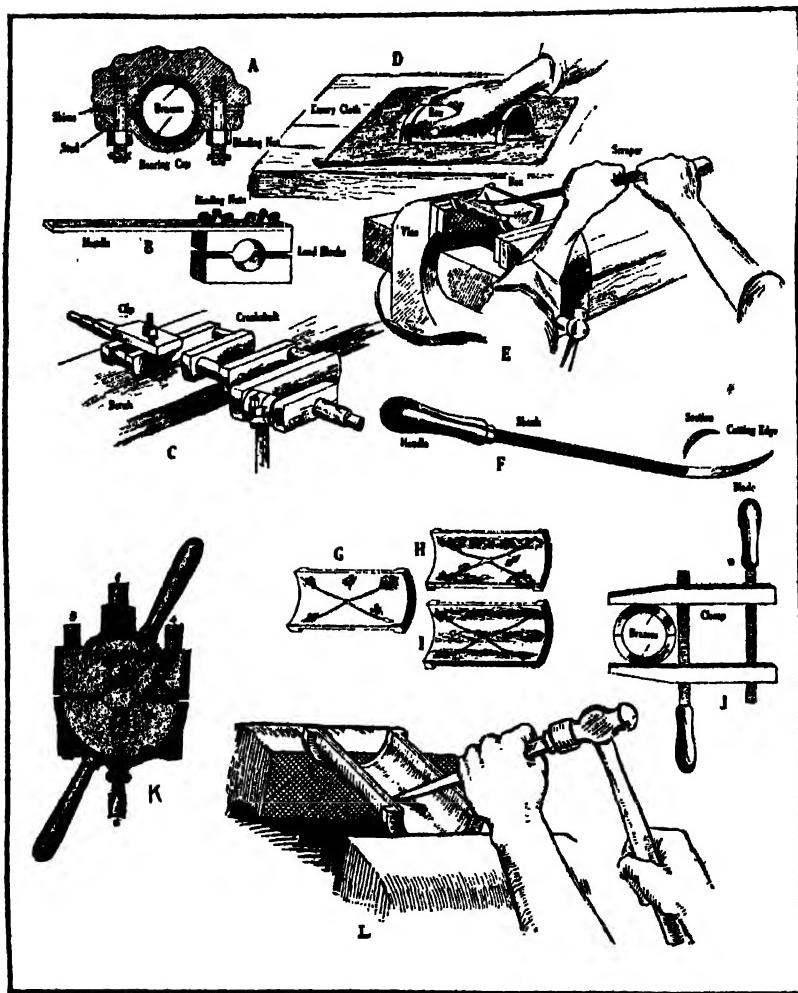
Processes and Tools Necessary for Bearing Restoration.
